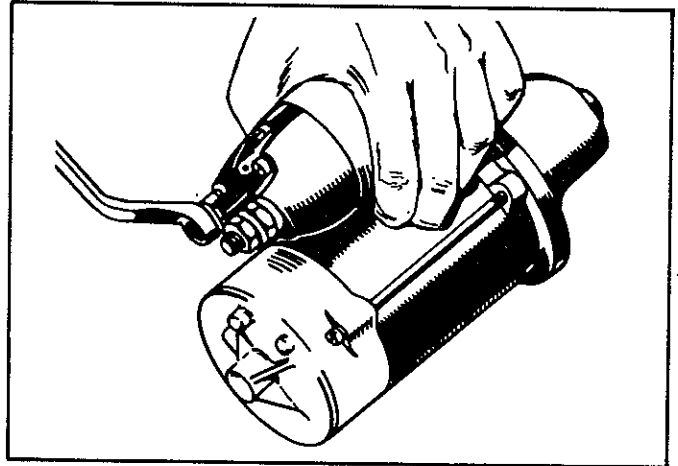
CONNECTOR LEAD REMOVAL
